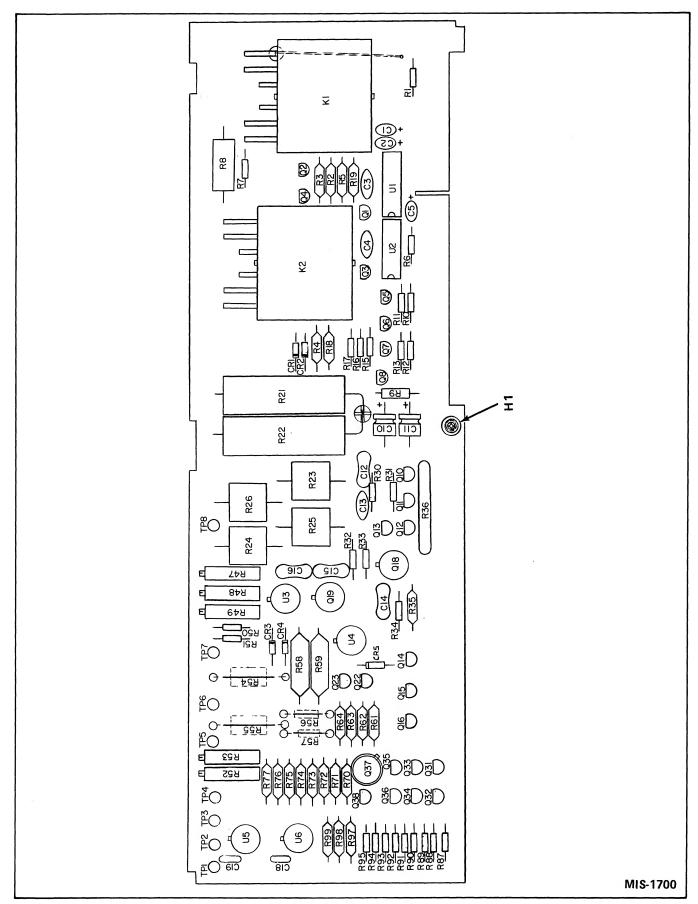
A8 DC Signal Conditioner PCB Assembly
